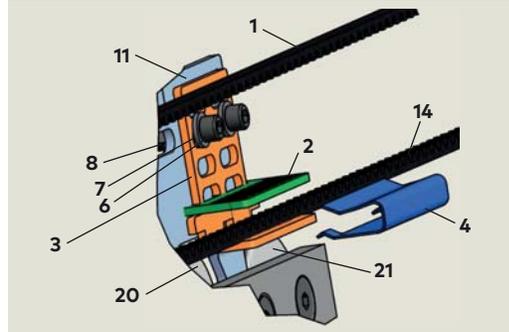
Bottom of belt bracket assembly to carrier bar belt bracket
